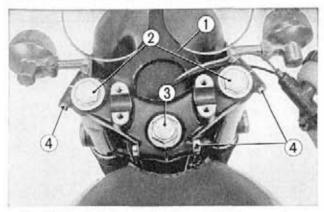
① Fork top bridge ③ Stem nut ② Front fork top bolts ④ 8mm setting bolts
